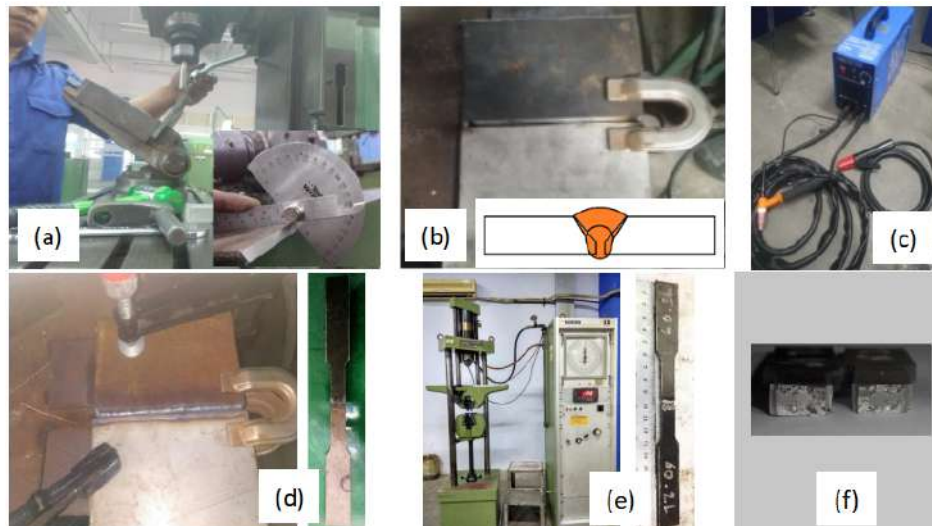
(a) Preparation of welded plate material by making side grooves at a 30° angle with a milling machine, (b) bonded with welds for setting the distance between the bimetallic, (c) welding with TIG Welding equipment, (d) cutting and shaping into a standard tensile test specimen size, (e) tensile testing with a Universal Testing Machine, and (f) the fracture surface of the broken specimen
